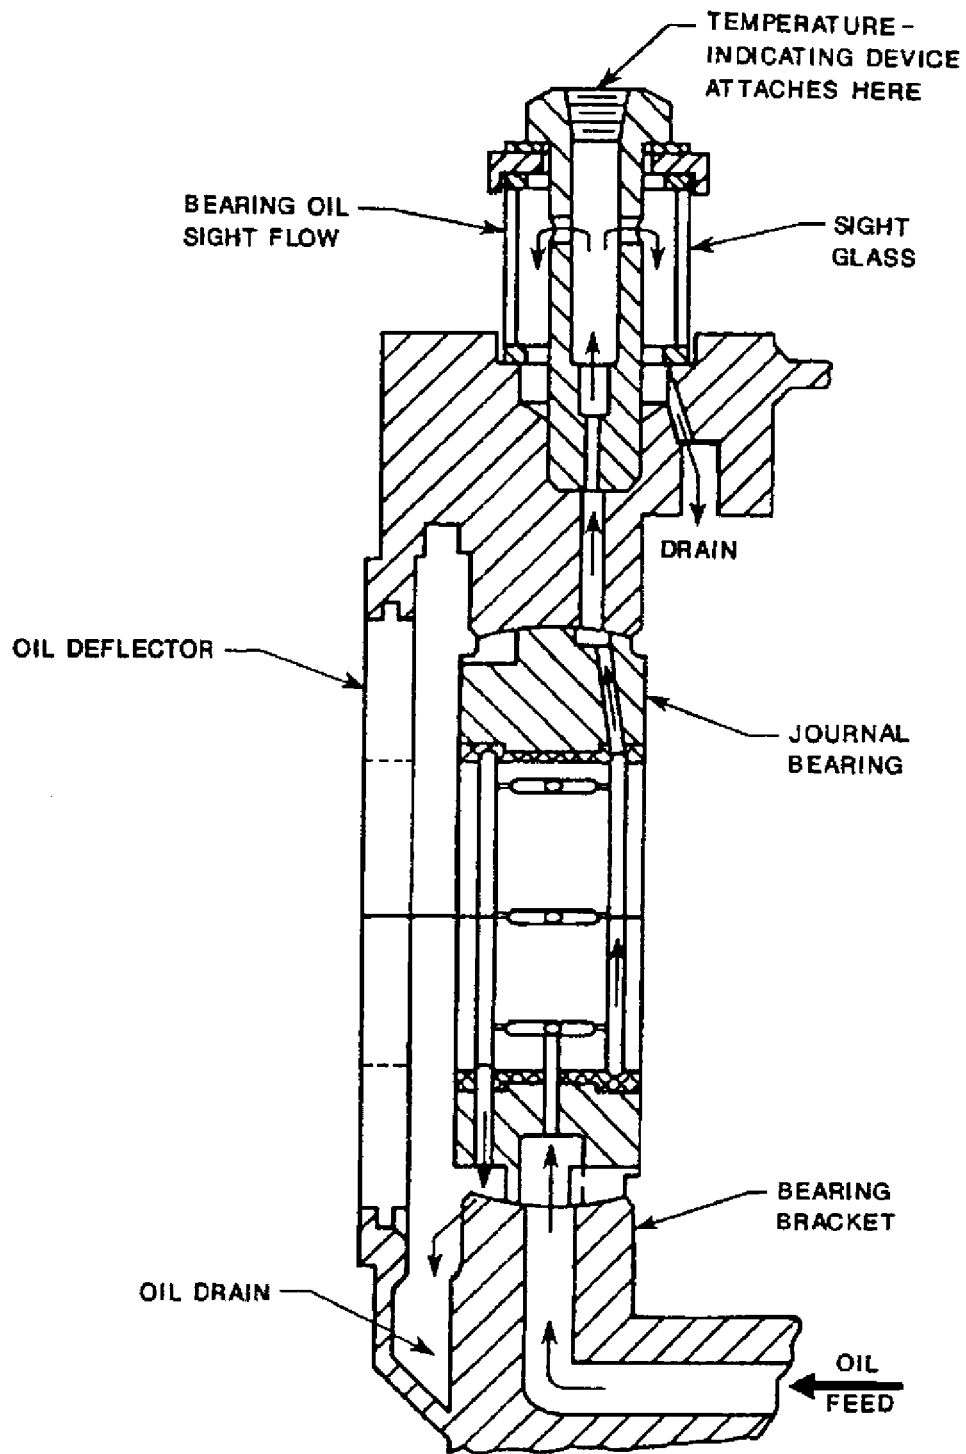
Oil Flow to Journal Bearing Bubbler and Temperature Indicator
